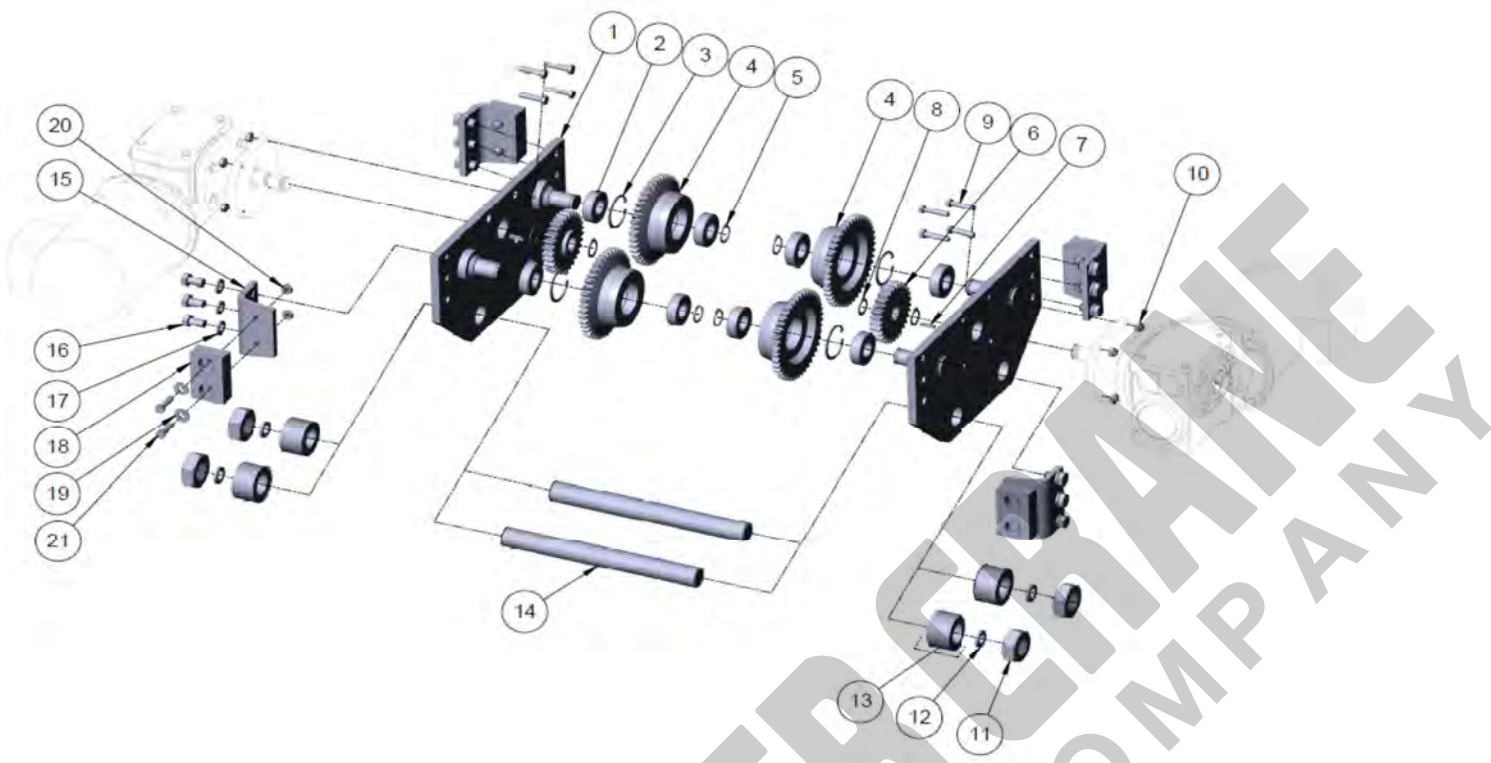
Trolley Frame and Wheel Assembly Two Motor 8" Wheels
